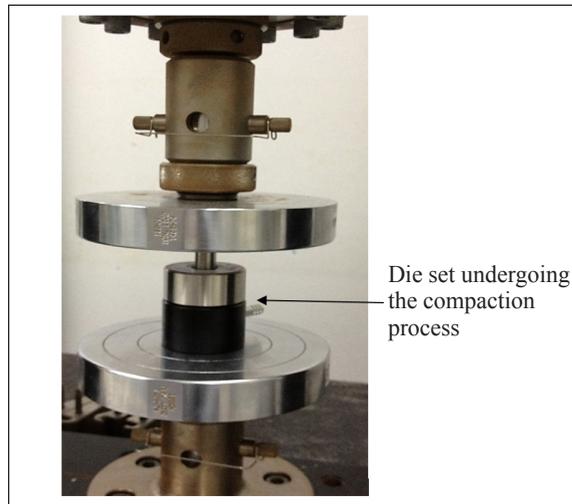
The laboratory uniaxial die compaction process using a universal testing machine
